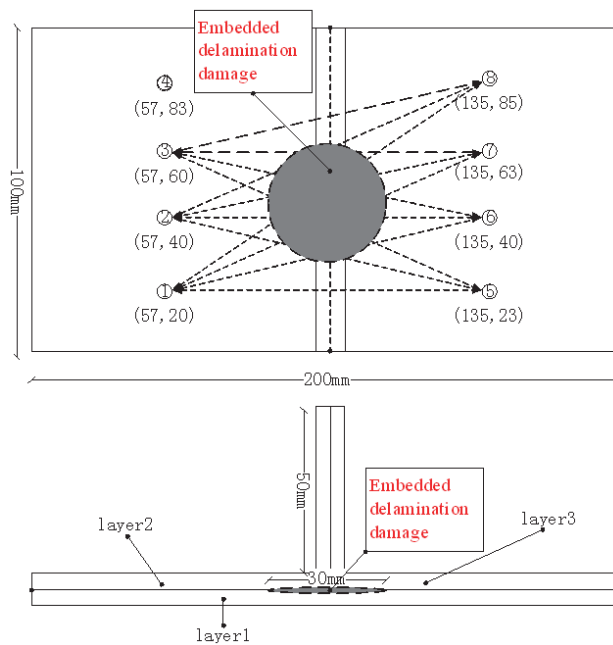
Size of specimen, location of embedded delamination damage and sensors.
